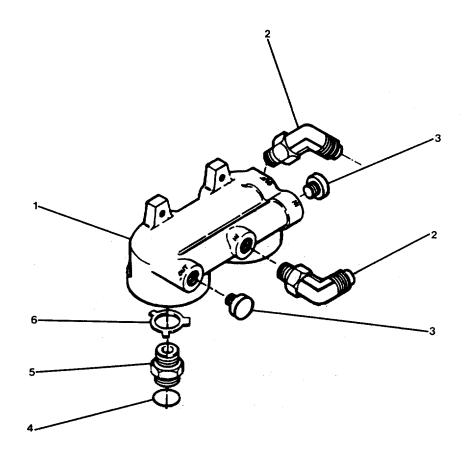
Lube Oil Bypass Filter Assembly.
